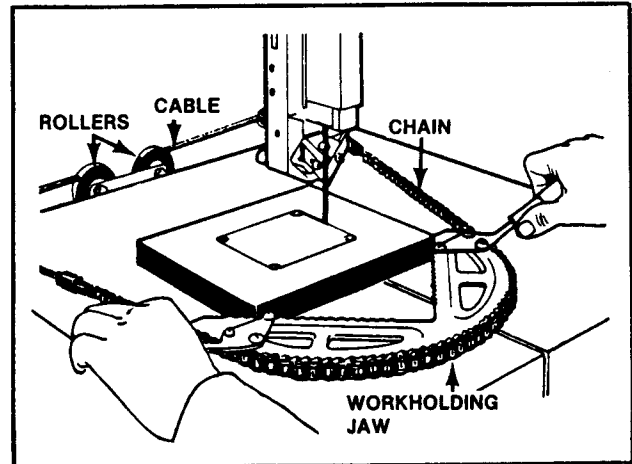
ADJUSTABLE WORK HOLDING JAW.
